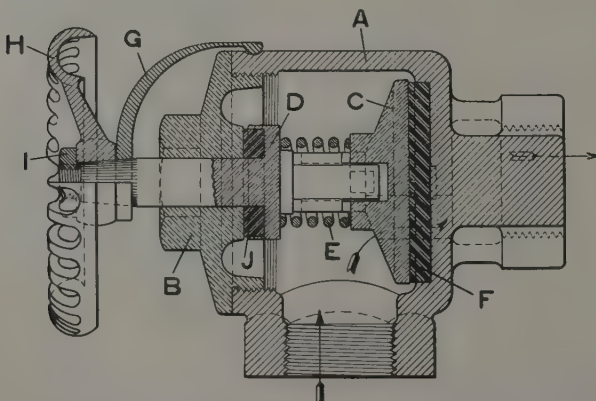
Section Through Valve Shown in Fig. 2068.
